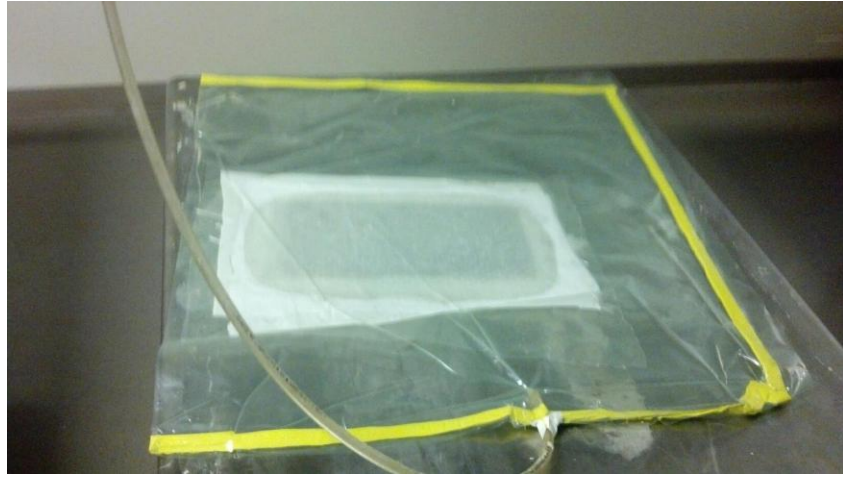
Vacuum bag sealed and vacuum applied to the Fiberglass panel
